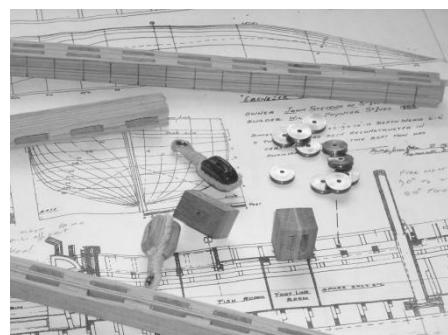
, shows the manufactured strips of the shell blanks. (The brass sheaves are 10mm in diameter, this will give a reference of size.)
